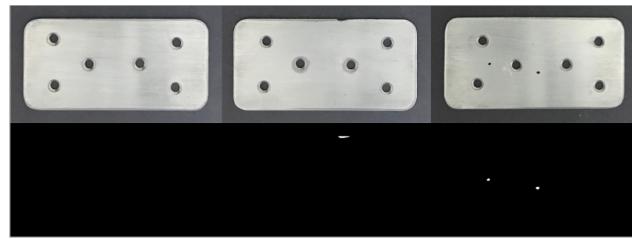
Defects in Metal Parts sub-dataset - top row(left to right) :Normal, Chipping, Porosity; bottom row(left to right) : Ground truth masks
